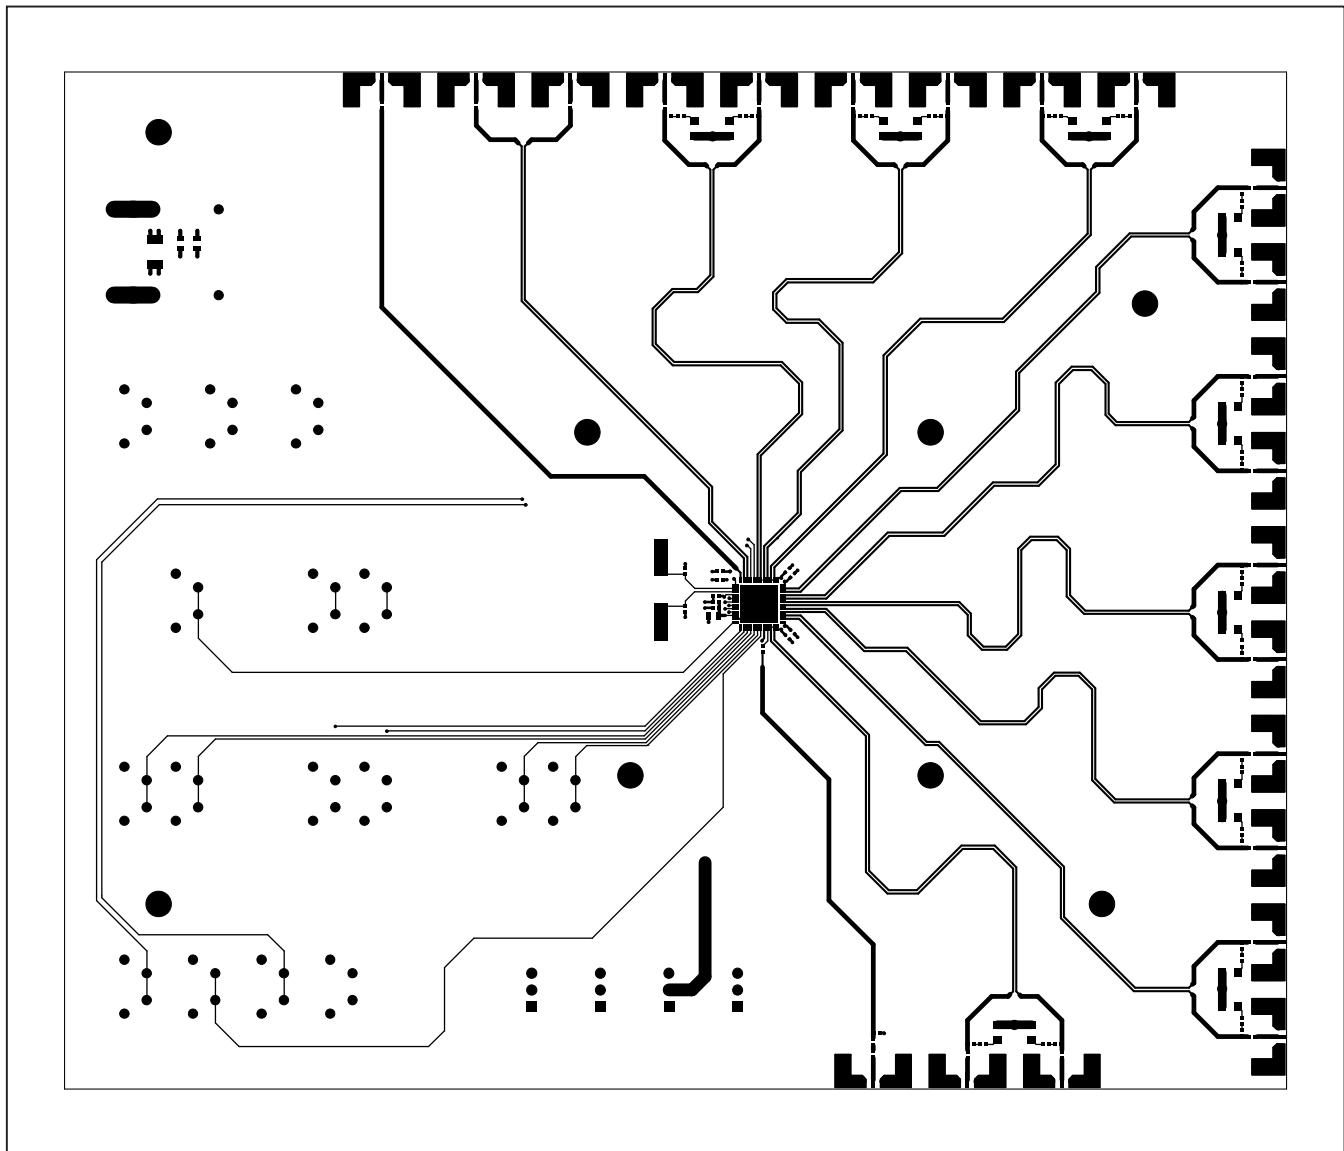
MAX3637 EV Kit PCB Layout—Component Side
